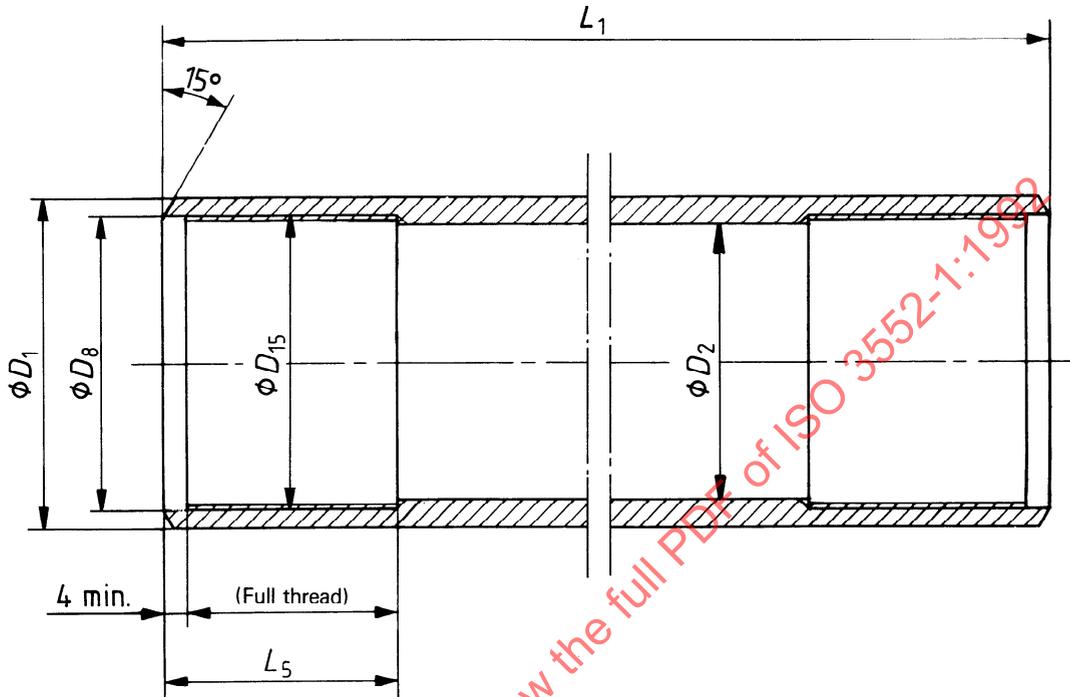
Core barrel, Type B – Extension tube (see table 22)
